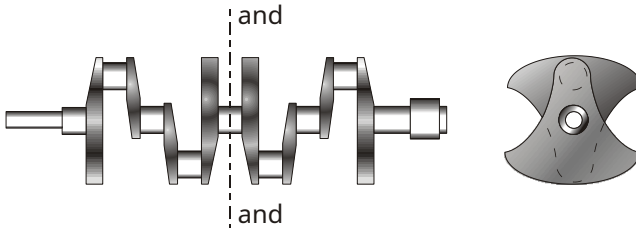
Crankshaft of an inline four-cylinder engine with single counterweights: a-a – plane of symmetry
